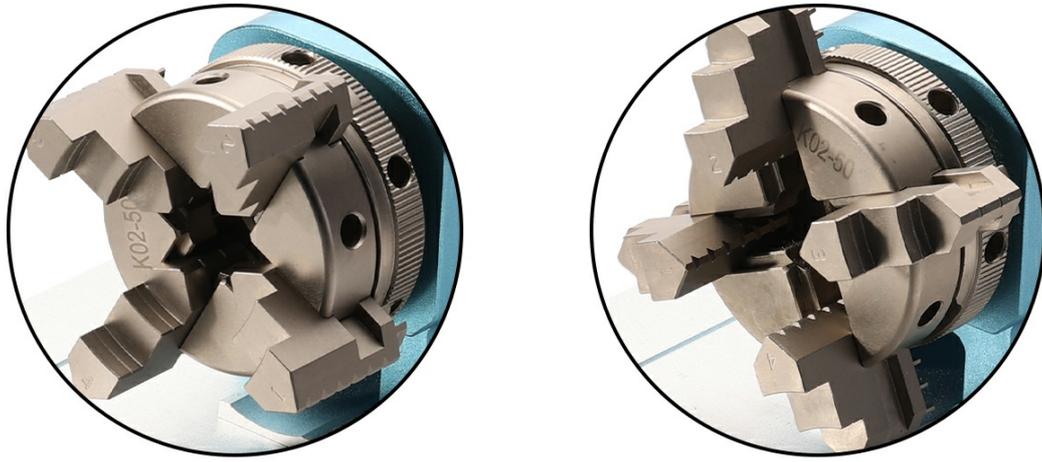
The 4th Axis Rotary Module installed on a compatible CNC machine.
